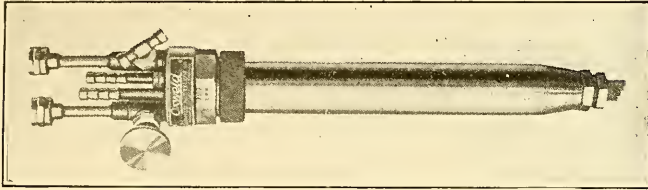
Four-Jet Type W-5 Water-Cooled Welding Torch.
